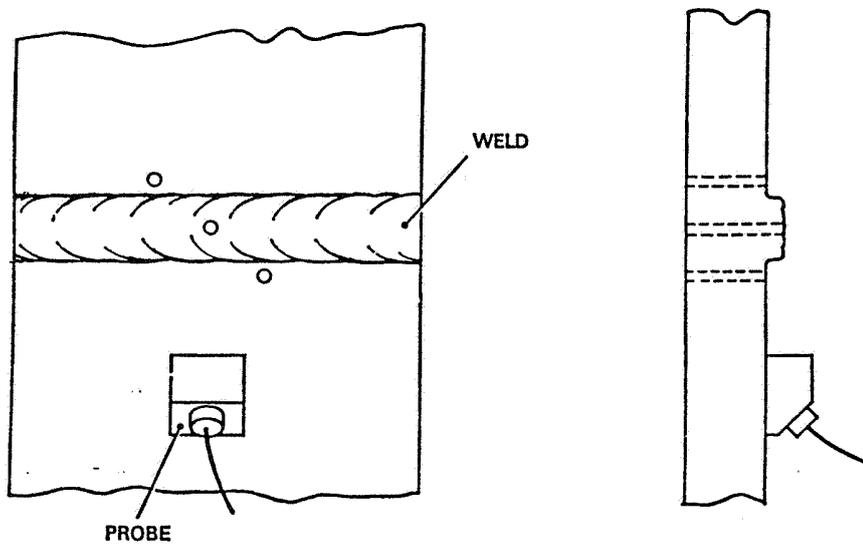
TEST HOLES IN WELD SAMPLE
